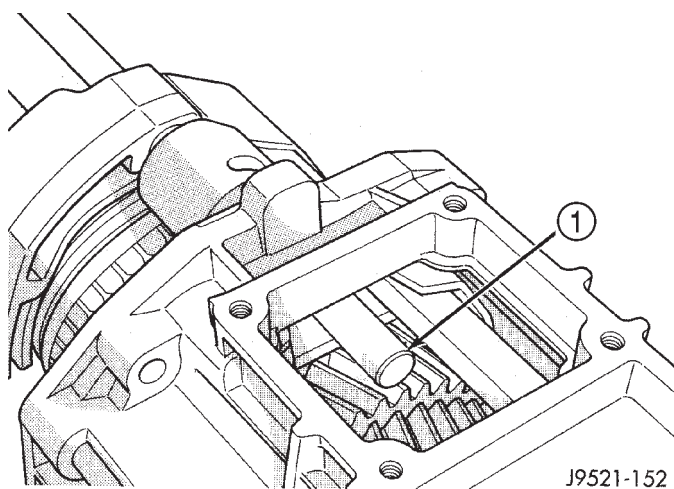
LEVER AND BUSHING ASSEMBLY
